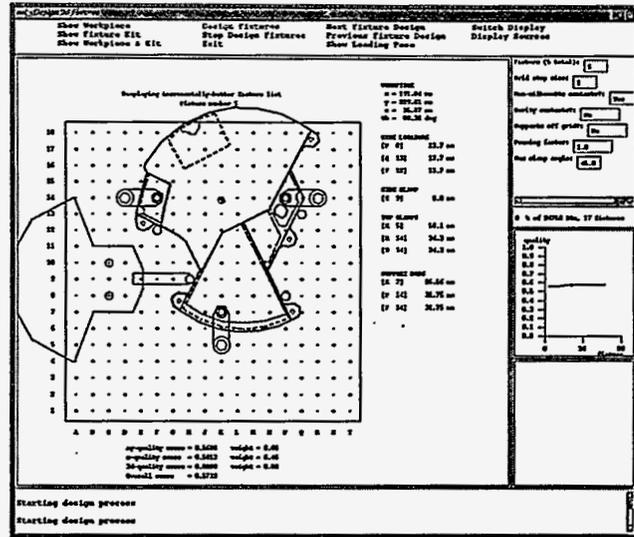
Fixture design for machining a prototype cast housing, shown with the design tool user interface.
